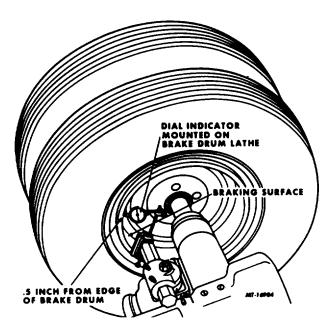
Checking Drum Runout on Brake Drum Lathe REFINISHING BRAKE DRUMS
